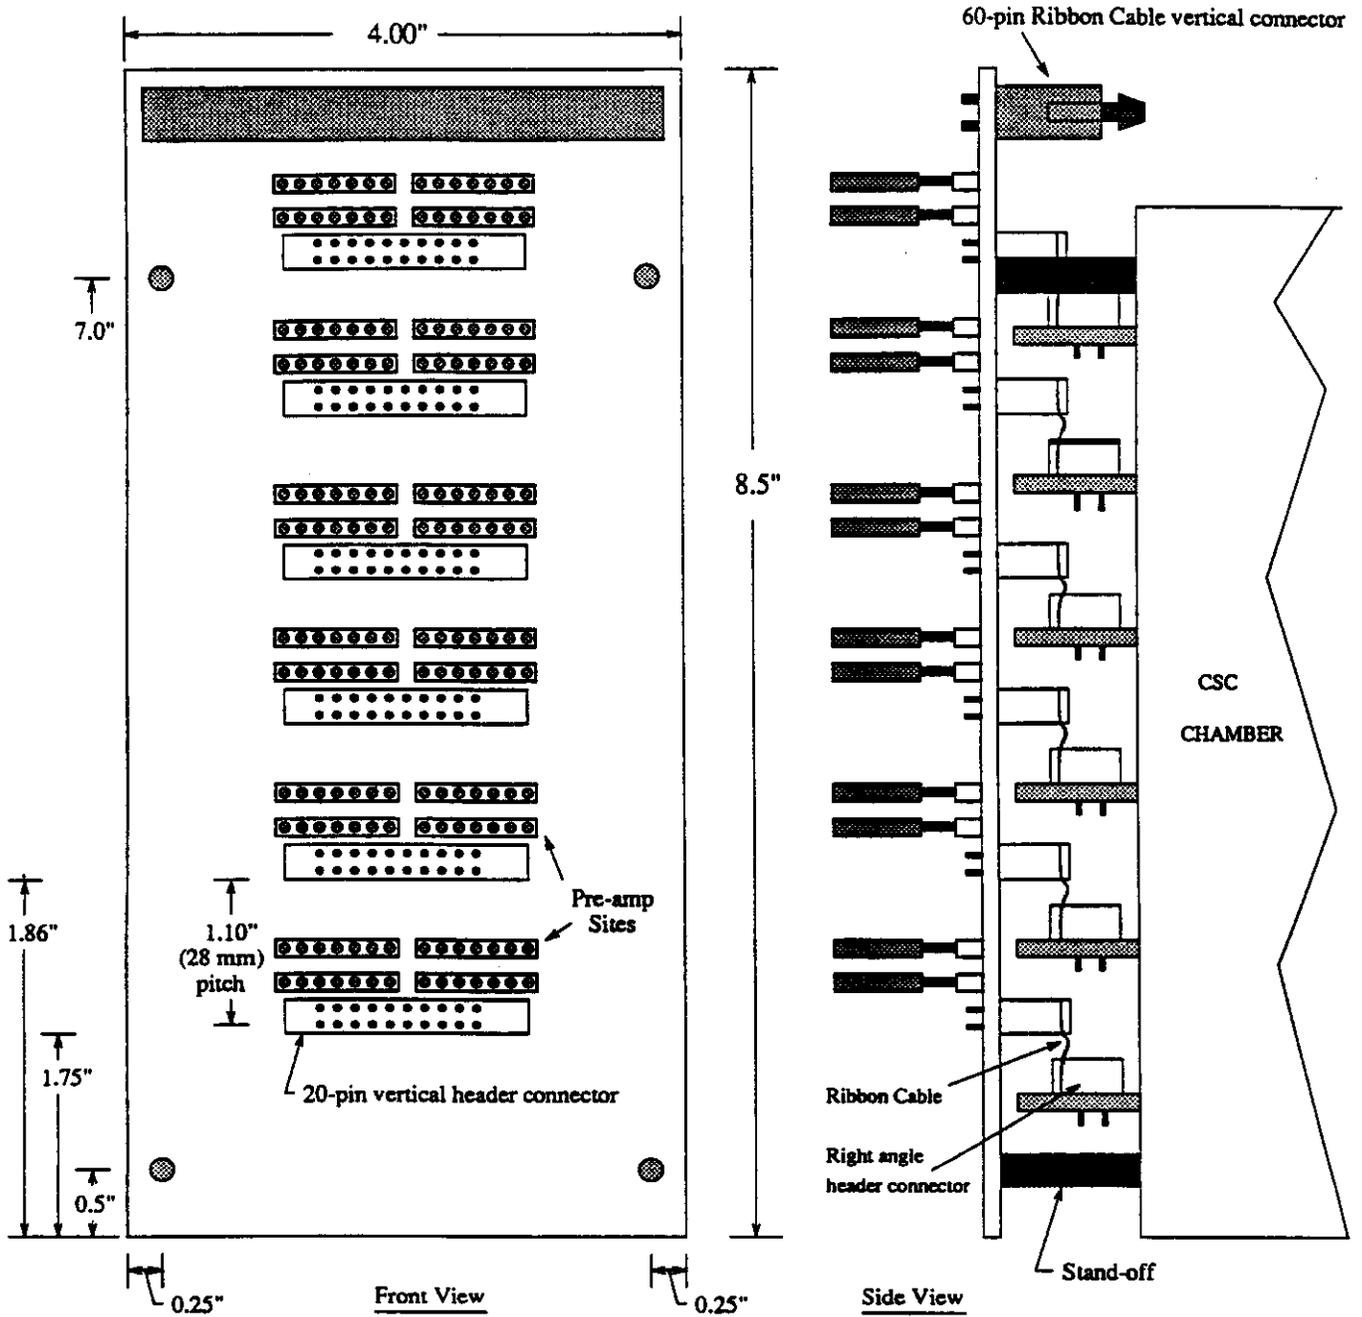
Mechanical dimensions and preliminary component placement for PCB1. Note that filter and bypass capacitors are suppressed for clarity,
